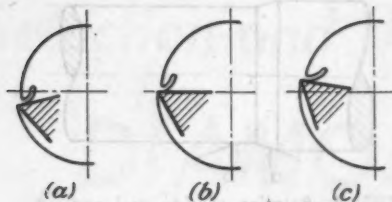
Positions of the diamond point relative to the work for boring operations: (a) Incorrect; cutting edge below center, tool edge is pressed into work. (b) Recommended; cutting edge at center height, rake angle zero. (c) Recommended for larger holes; cutting edge above center height, clearance angle small, rake angle large.
